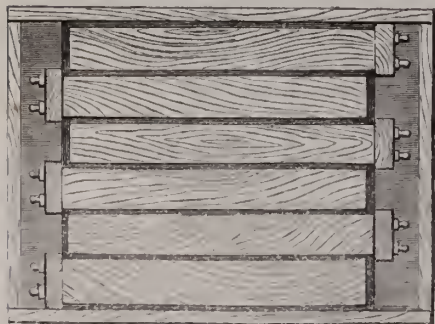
PLAN OF LOWER PART OF CAMERA, SHOWING THE SIX DOUBLE SLIDES.
